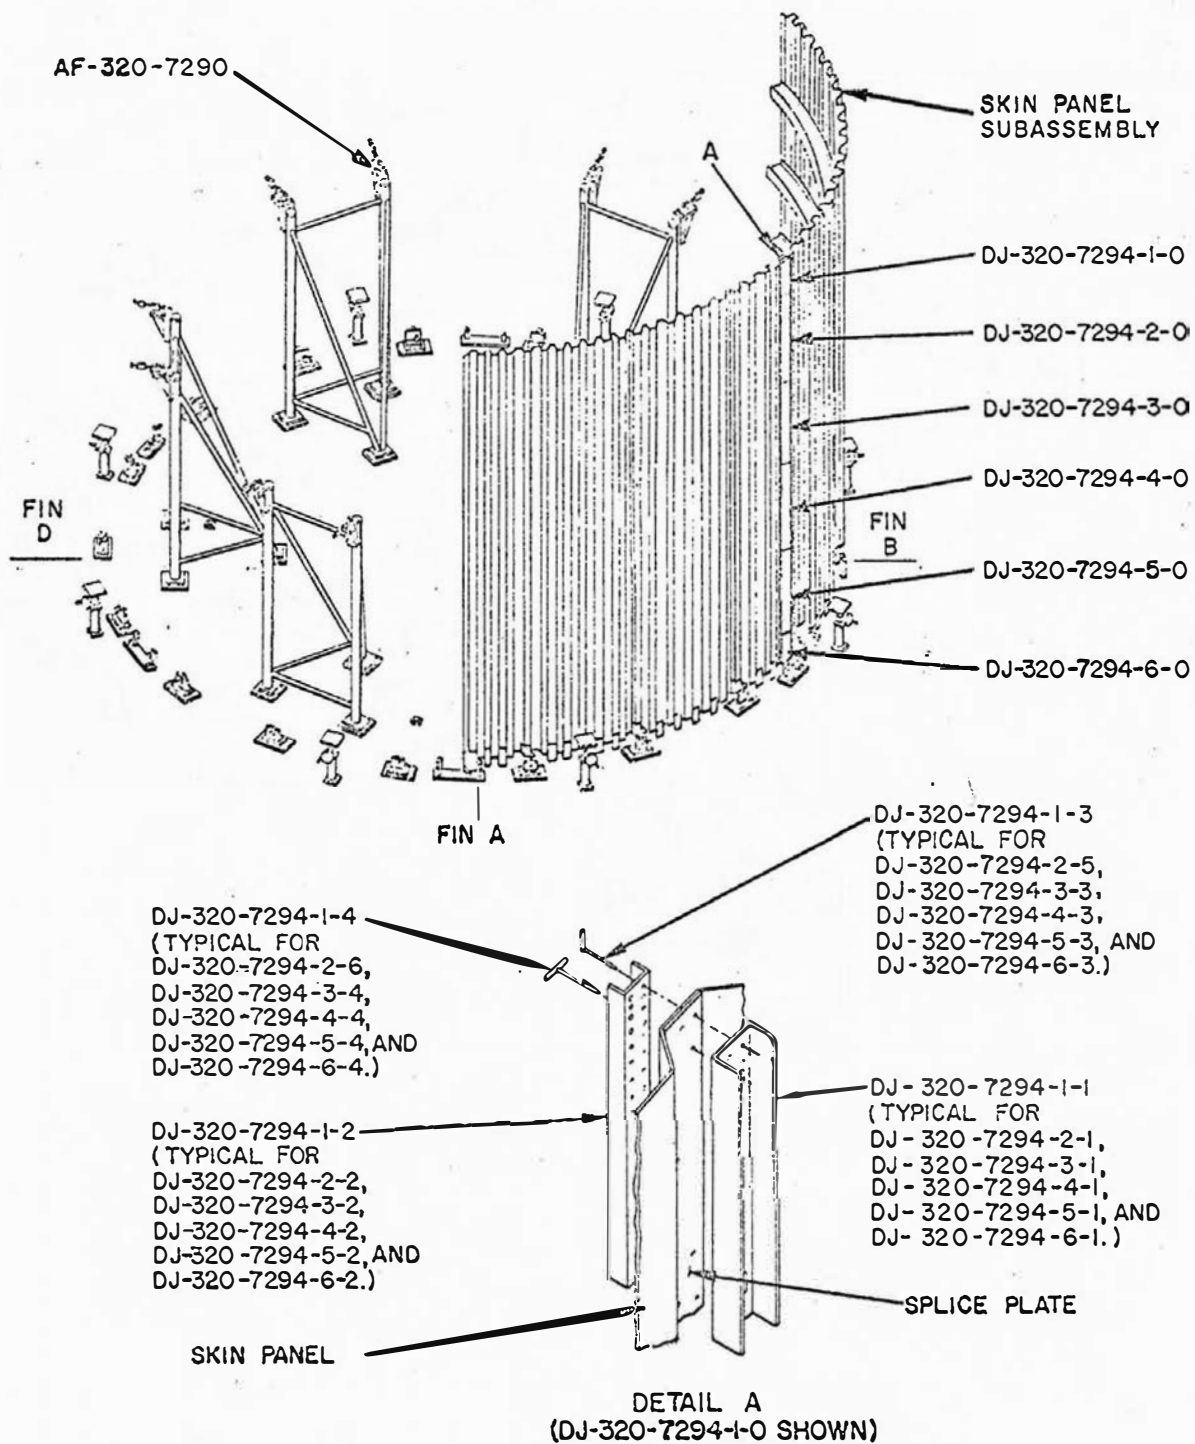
Drilling Skin Splices Using Drill Jig DJ-320-7294
